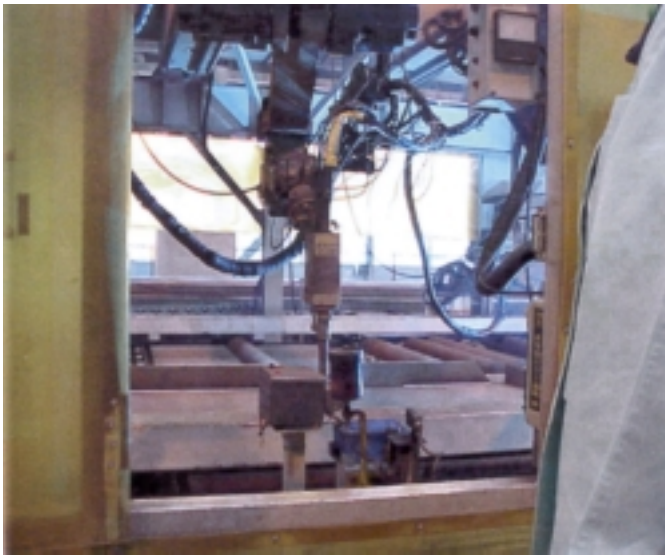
Robotic welding of girder web stiffener in Japan.
